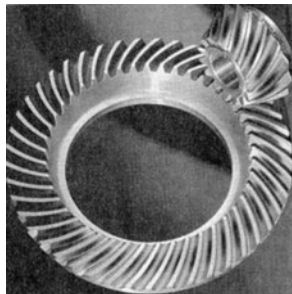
Spiral bevel gears. (Courtesy of Gleason Works, Rochester, New York.)
